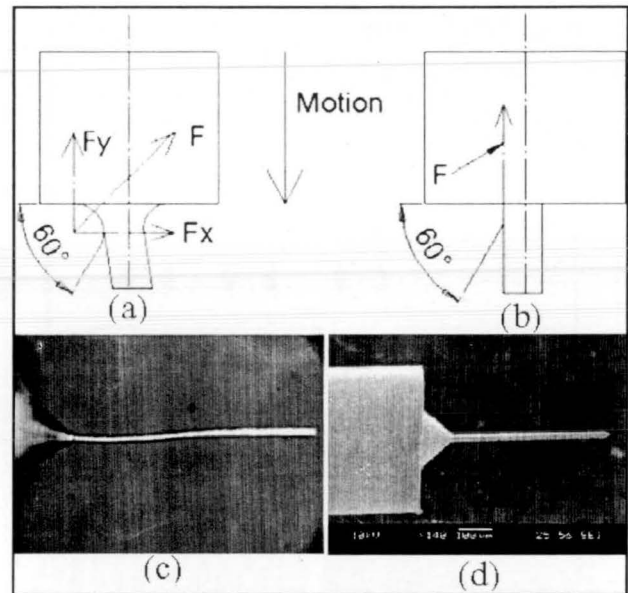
Example of Microturning Using on-Machine Modified PCD Turning Insert [38].
